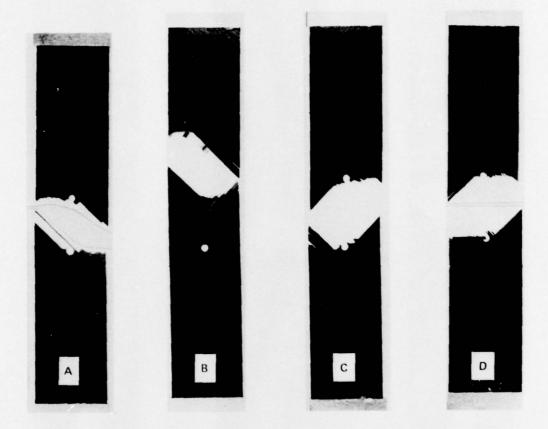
Fatigue failures of multi-plied 90 ± 45° CFC containing a 4mm diameter hole. Specimens were preaged for 3000 hours at 40°C and their endurances to failure were; specimen (A) 455000, (B) 348000, (C) 33100, (D) 1440 cycles
